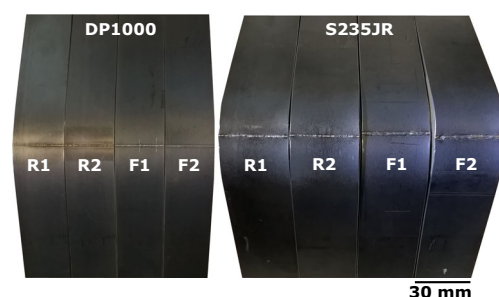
Three-point bend specimens of DP1000 and S235JR welds; R1 and F1 refer to root and face bend tests without oscillation; R2 and F2 refer to the root and face bend tests with beam oscillation
